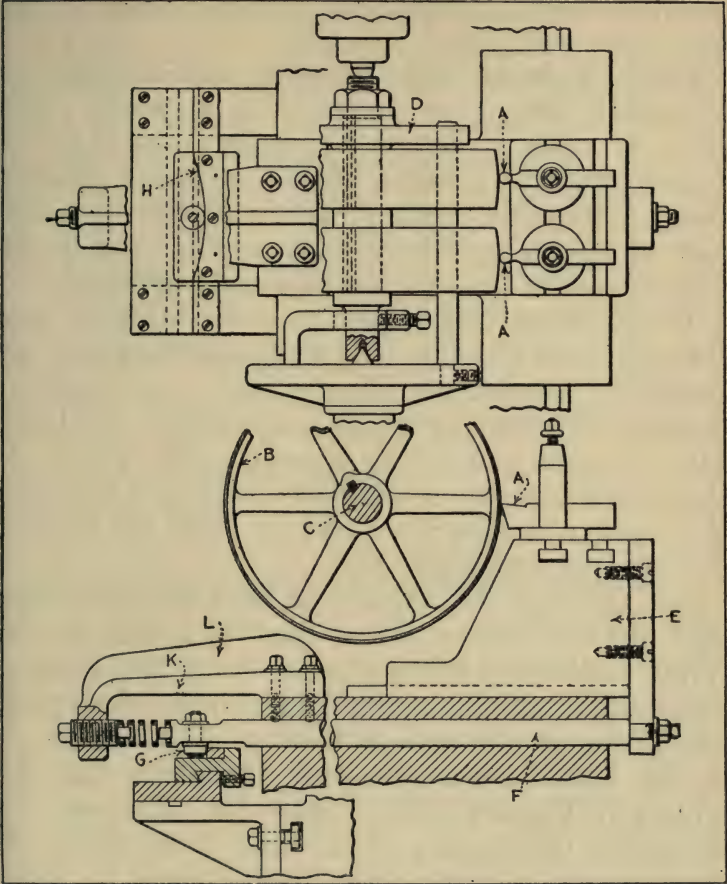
PLAN AND ELEVATION OF A RADIUS-FORMING ATTACHMENT FOR CROWNING PULLEYS
